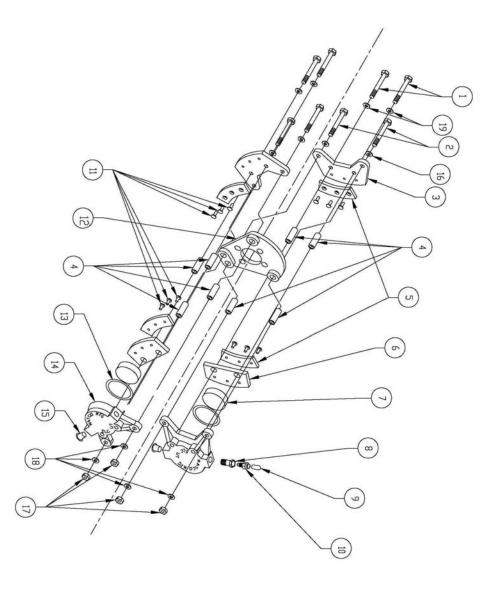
5-INCH SERIES WHLB5T TRIPLE PISTON 1.25"
